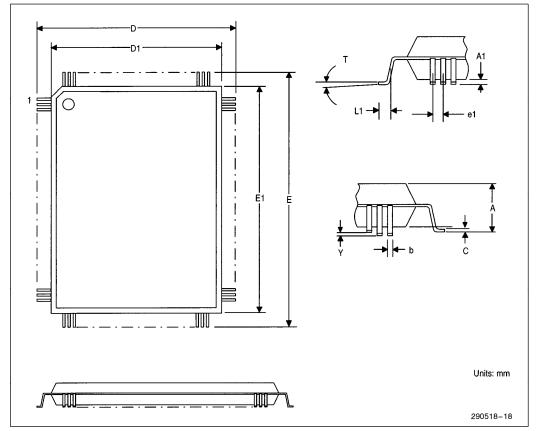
100 Pin Plastic Quad Flat Pack (PQFP) Dimensions
